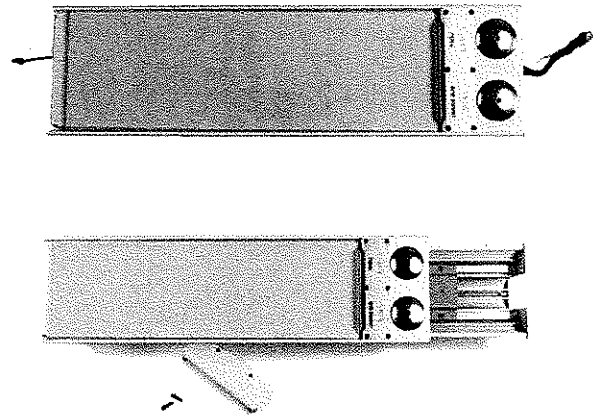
Direction of Sliding the Front Panel Assembly from Back Housing Assembly
